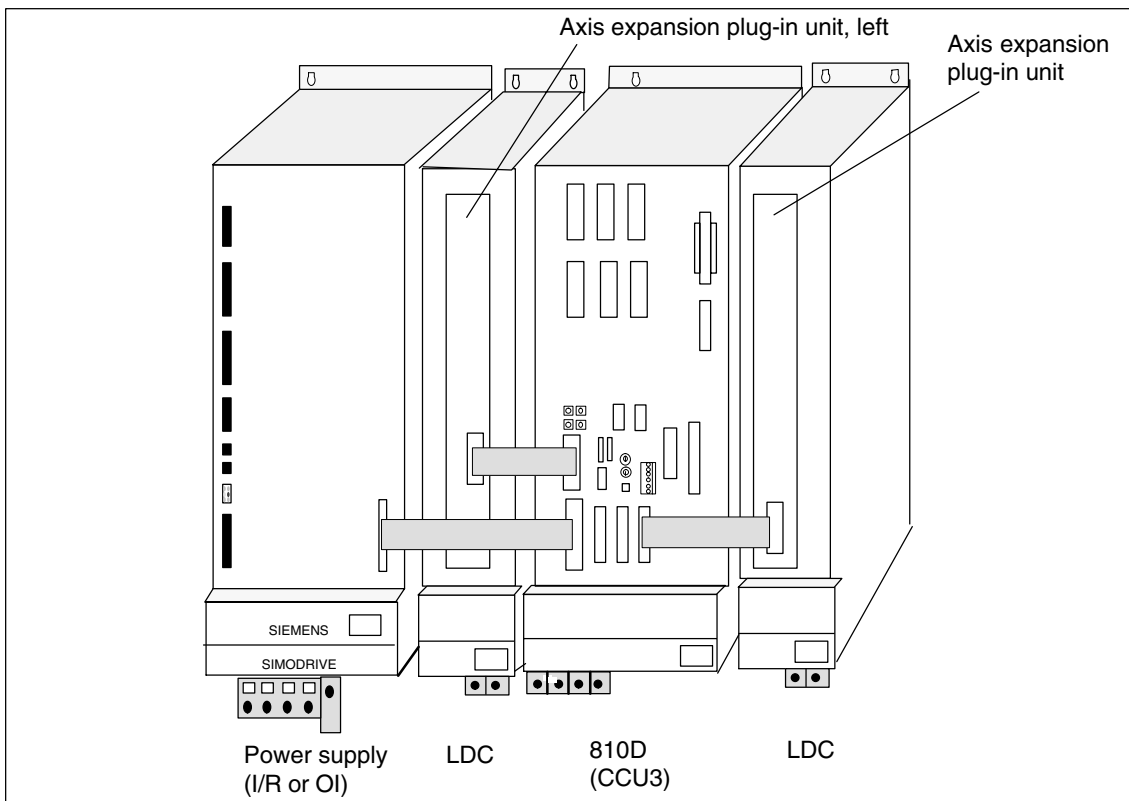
Overall assembly SINUMERIK 810D with SIMODRIVE 611 power module
